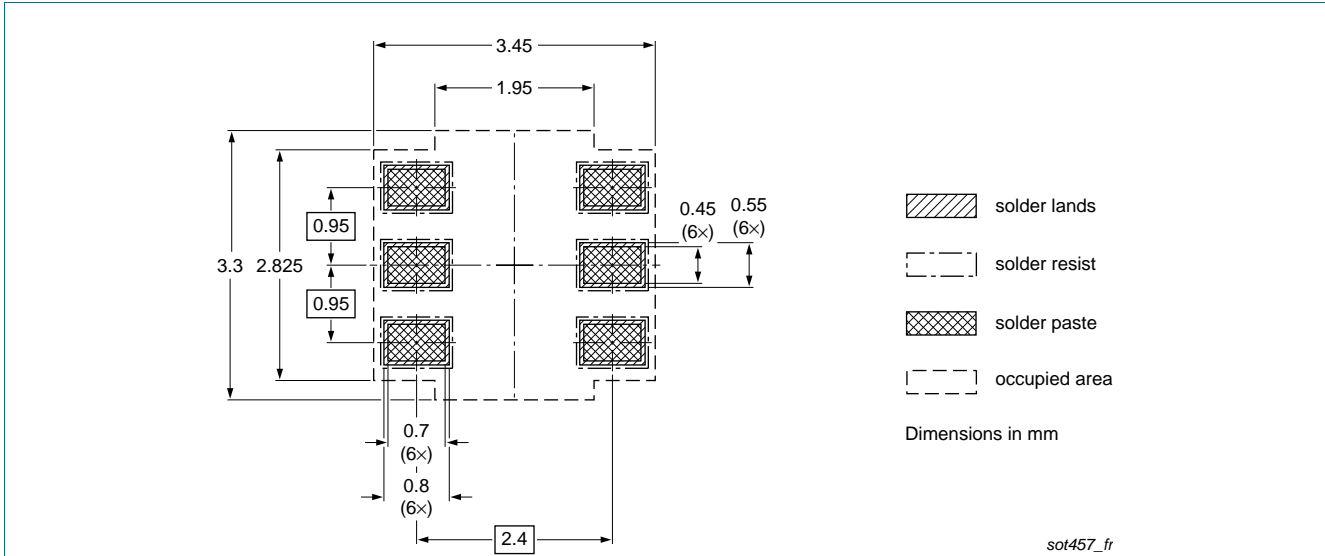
Reflow soldering footprint for SOT457 (TSOP6)
